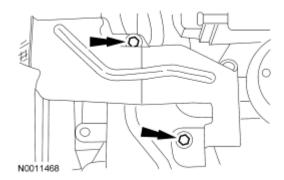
Intake Manifold Shield Courtesy of FORD MOTOR CO.
